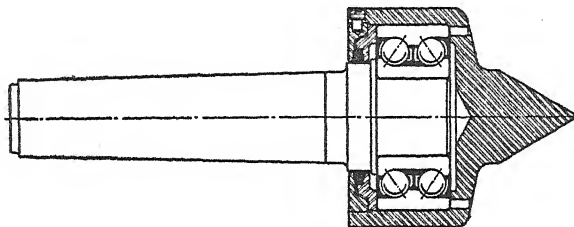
The "Red-E" New Departure Ball-Bearing Tailstock Center.
